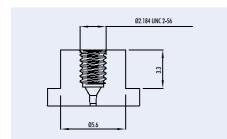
Detail of thread in cross-shaped channel chip fluidic interface  $\,$
